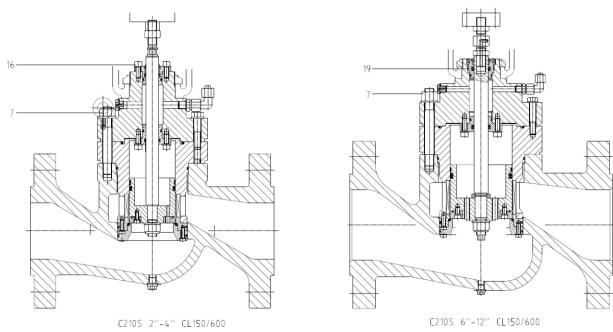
Bolt for pressure retaining parts of HON C210S (M)
